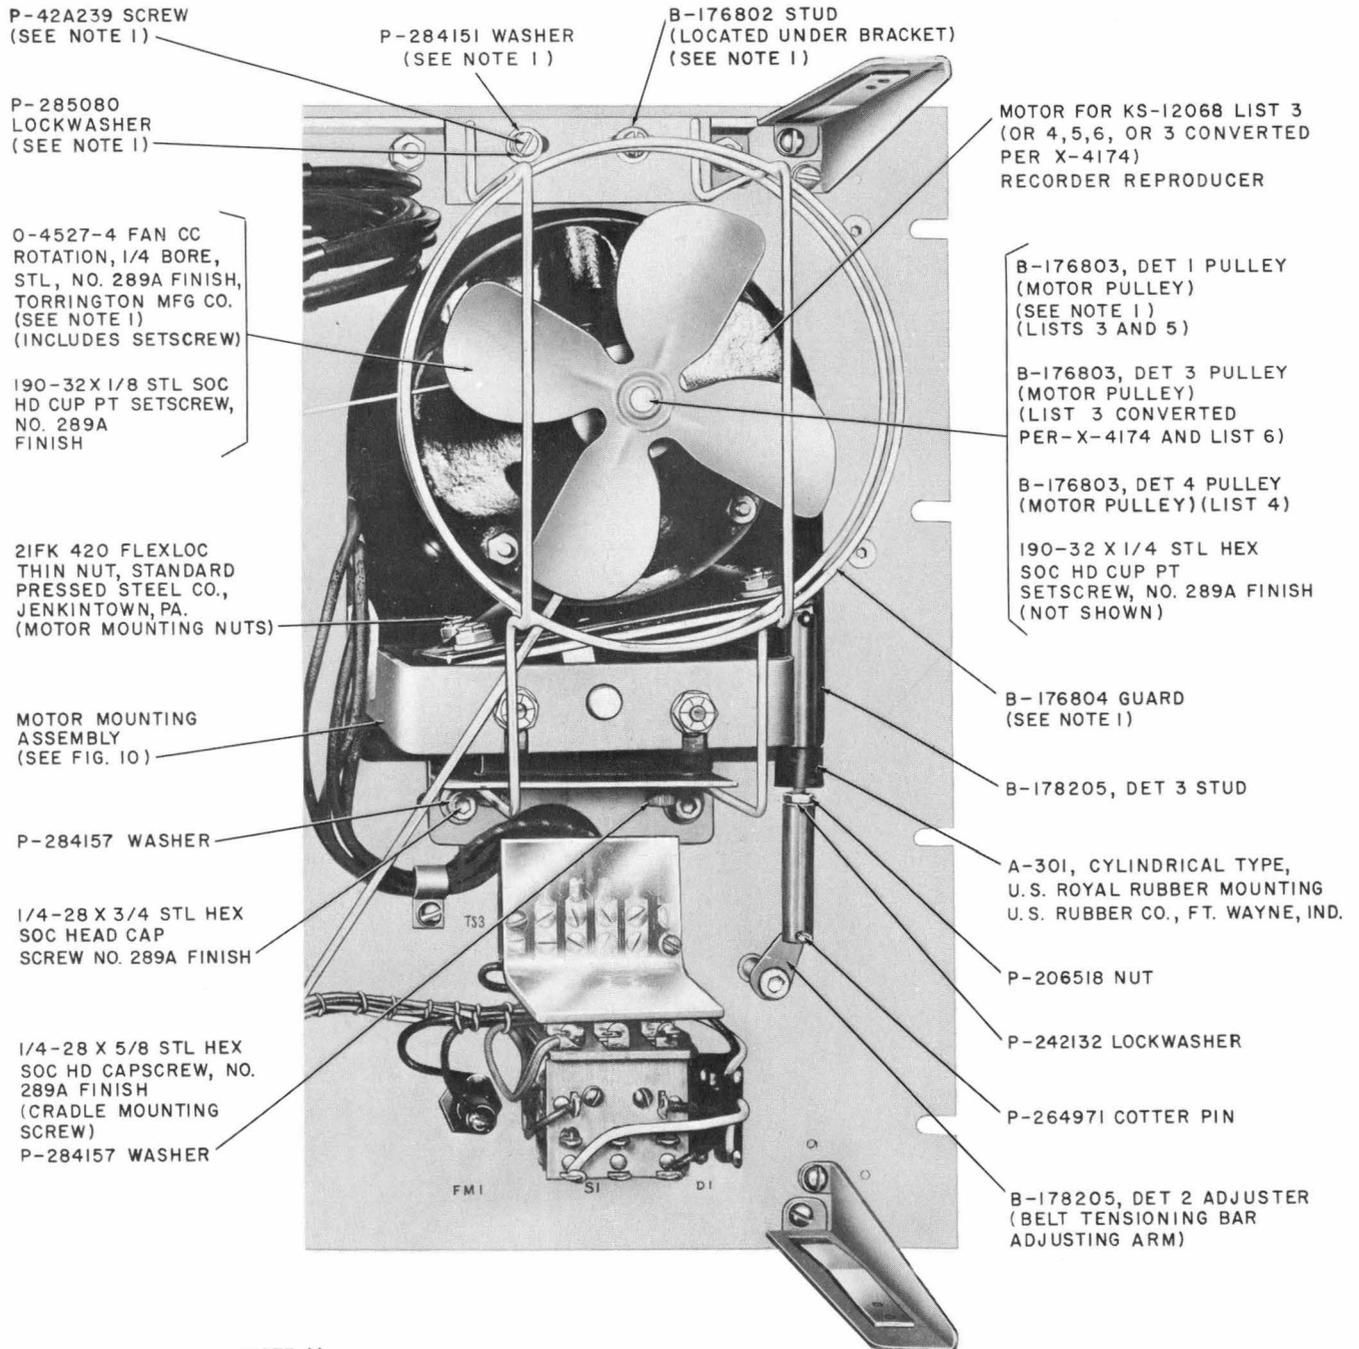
KS-12068 L4, L5, and L6 Recorder-Reproducers — Rear View Showing Parts Located Below the Motor (L5 machine shown)
